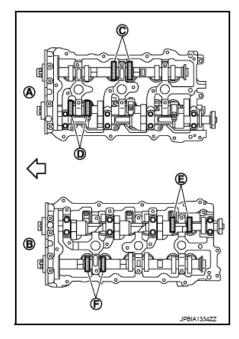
Locating Valve Clearances Measurement Areas Courtesy of NISSAN NORTH AMERICA, INC.
